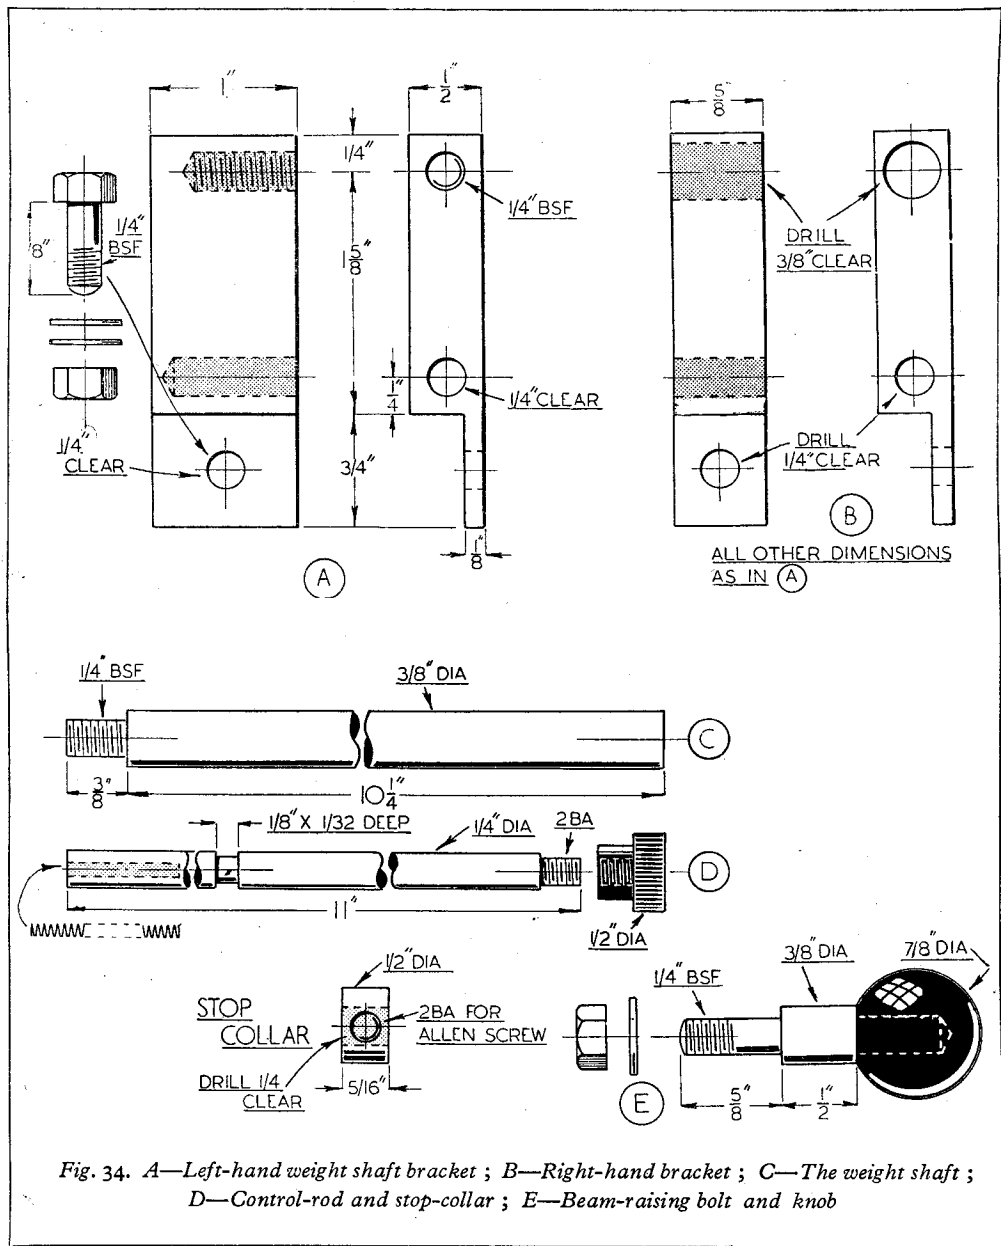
A—Left-hand weight shaft bracket ; B—Right-hand bracket ; C—The weight shaft ; D—Control-rod and stop-collar ; E—Beam-raising bolt and knob
